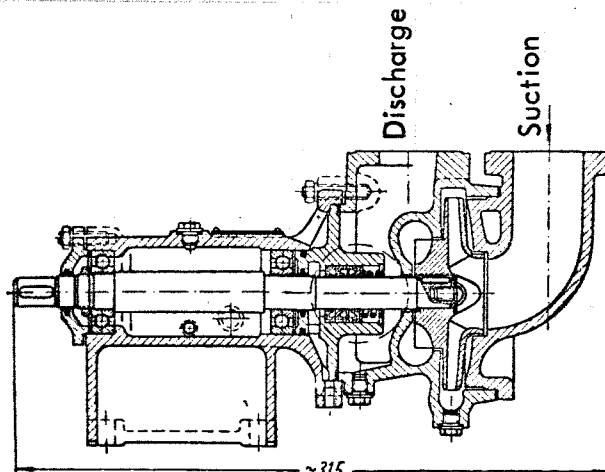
2.5TsV-5 Pump with a Single Centrifugal-Vortex Impeller.
